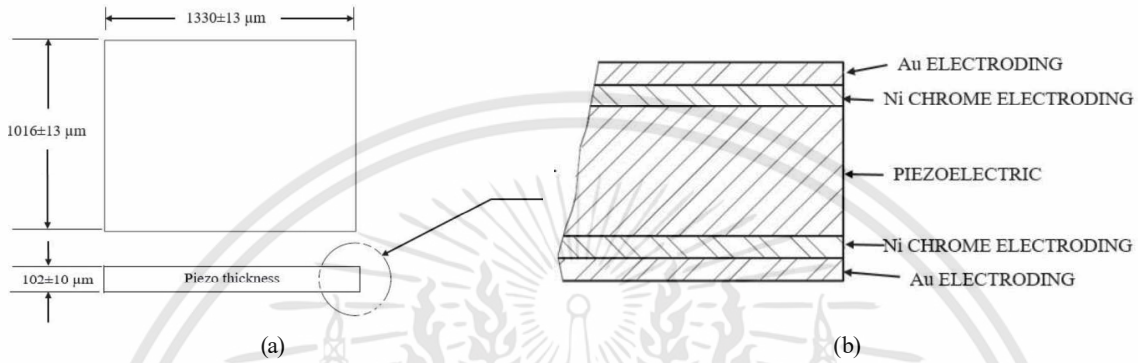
(a) Piezoelectric material dimensions and (b) cross-sectional view.
